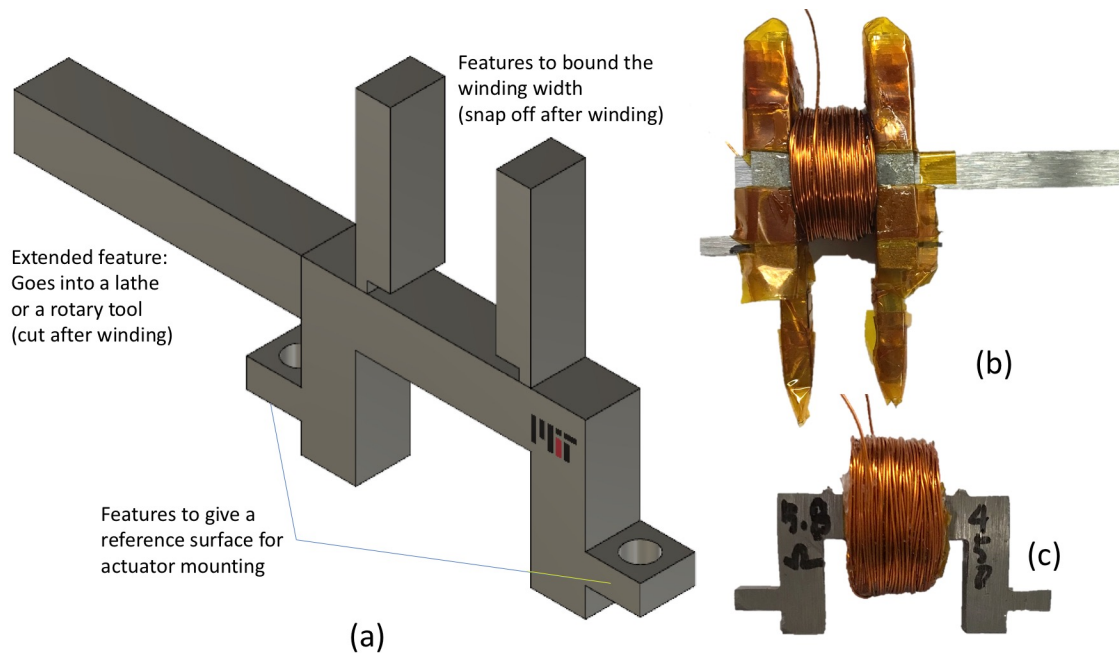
Stator modifications to facilitate easier assembly. (a) CAD model describing the modified features. (b) Stator after winding showing template to restrict the winding width. (c) Stator after winding, with the winding-support features removed.
